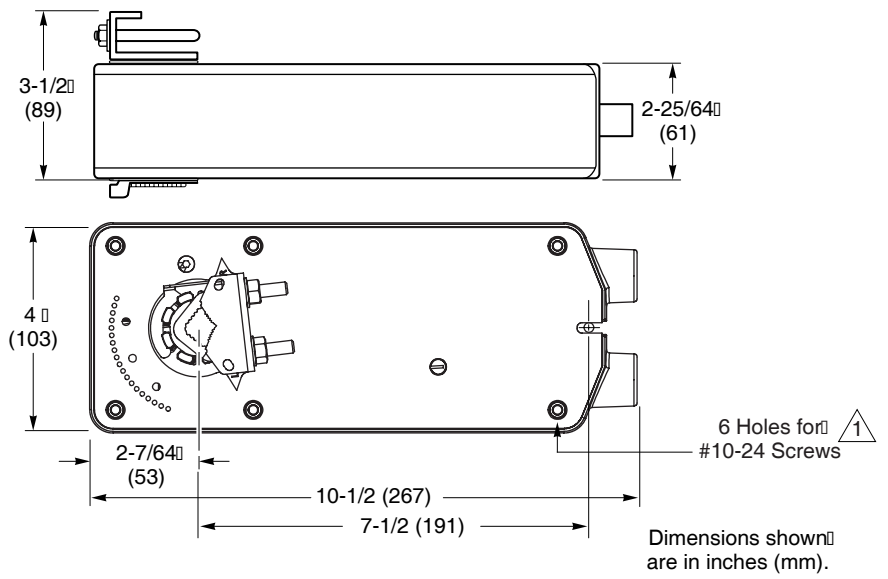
MS40-7043 Spring Return Damper Actuator Dimensions.
